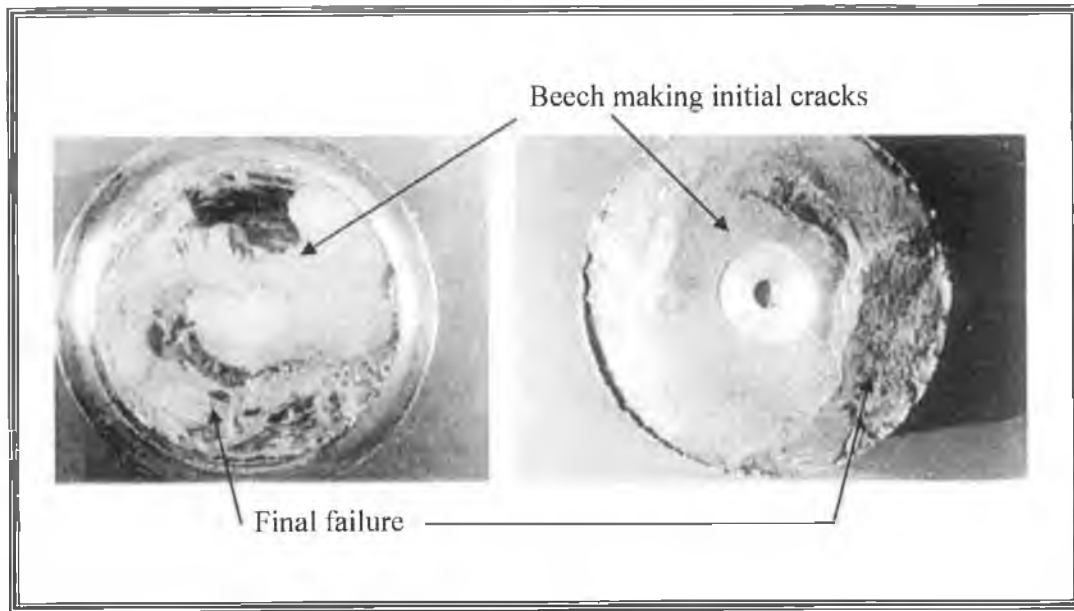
Photograph of pump shaft failure due to cyclic fatigue, [45].
